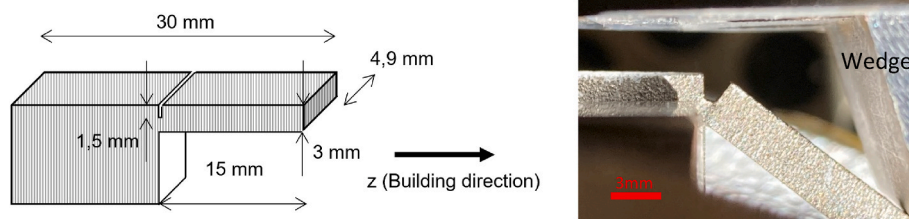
Notched macro-cantilever testing of HX LPBF specimens at macroscopic scale: (a) specimen dimensions - (b) observation of the cantilever specimen subjected to a flexural load applied by a wedge.
